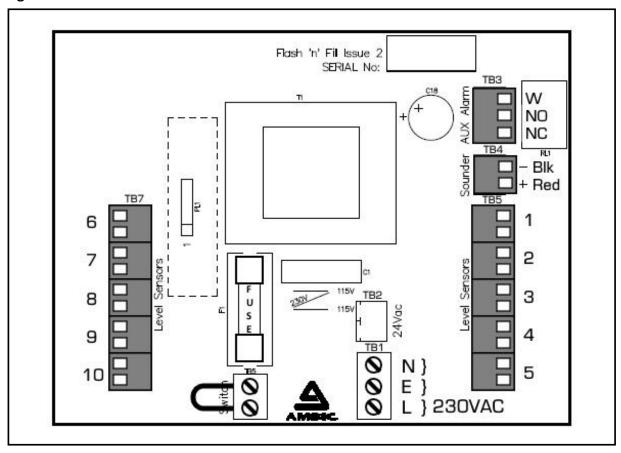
PCB LAYOUT - SHOWING TERMINAL CONNECTIONS
